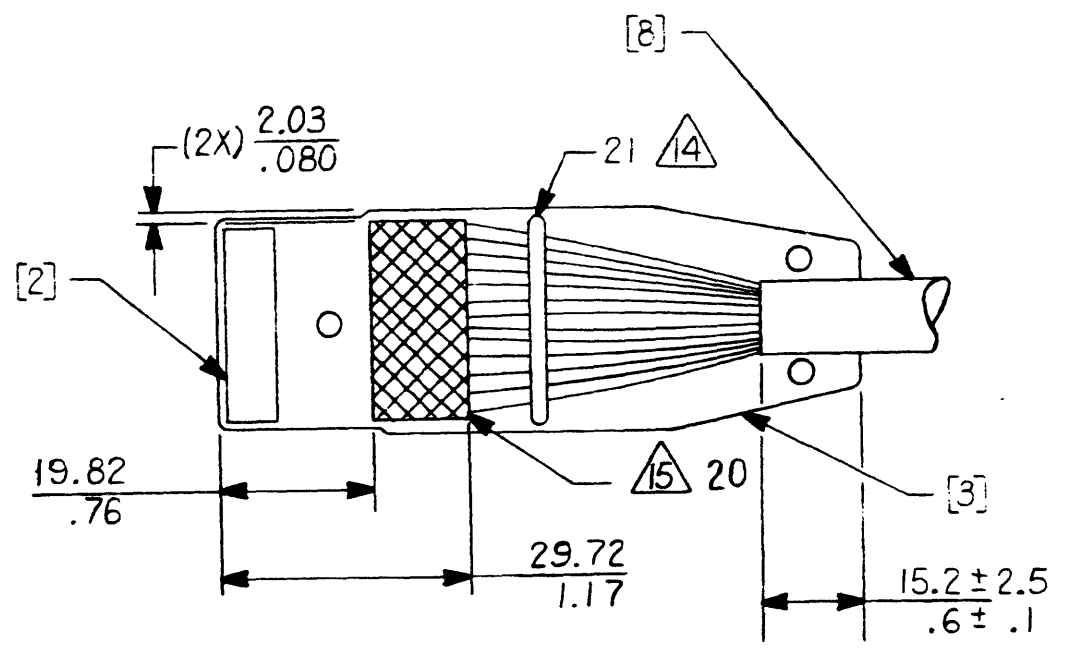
EXTERNAL CABLE ASSEMBLY
